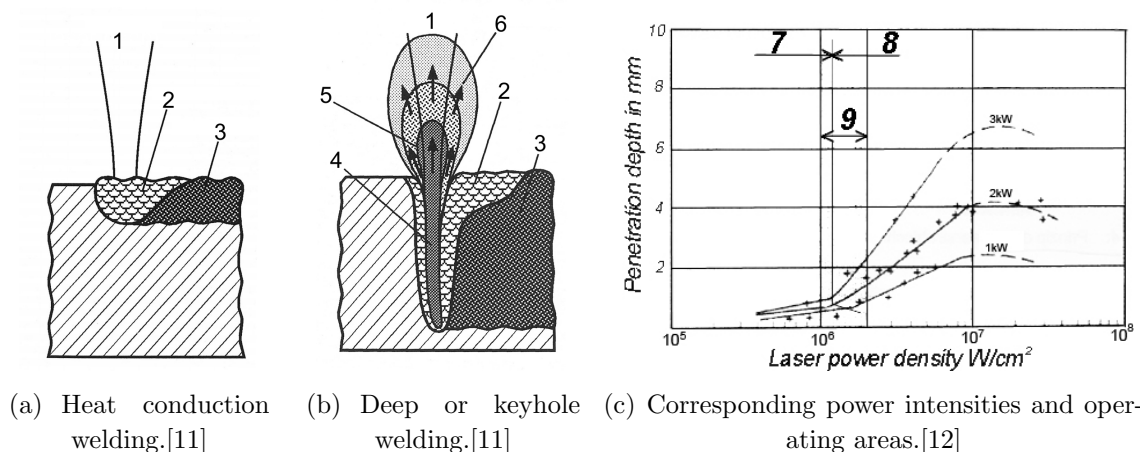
Heat encapsulation when laser welding. 1 laser beam, 2 liquid melting zone, 3 solidified melting zone, 4 vapor/plasma capillary, 5 laser induced plasma, 6 flowing out metal vapor, 7 operating area heat conduction welding, 8 operating area keyhole welding, 9 intensity area at plasma welding.
